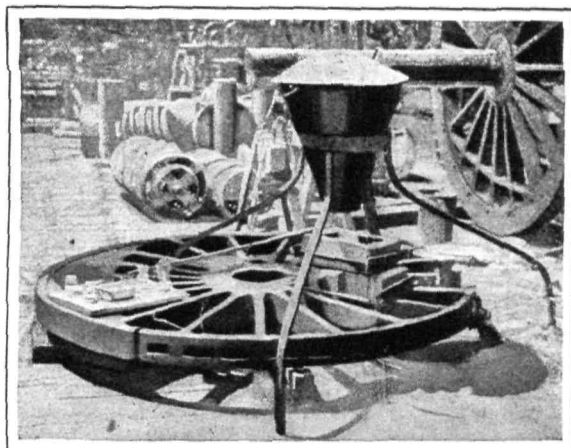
REPAIR OF DRIVER OF LOCOMOTIVE BY THE
